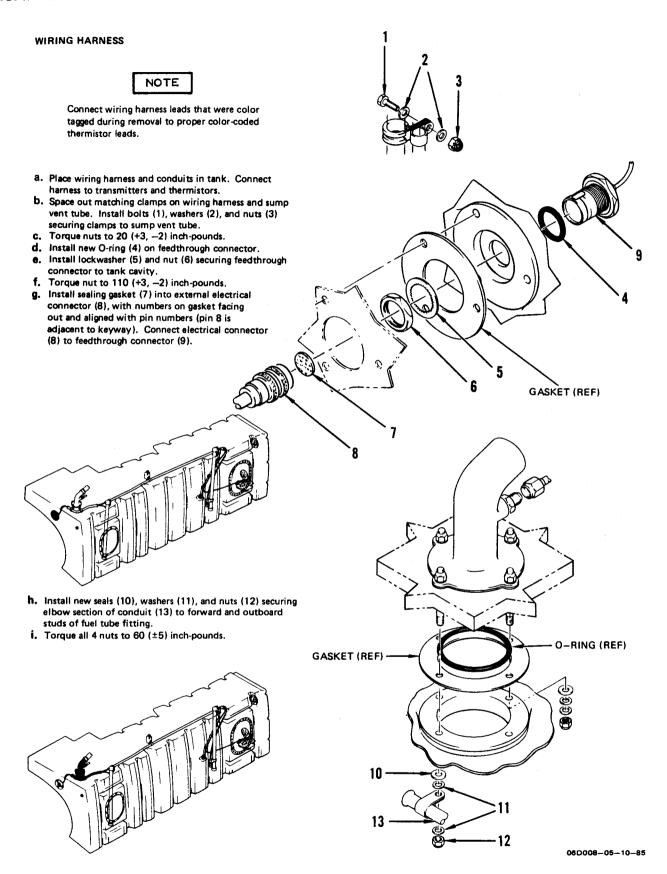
Installation; Forward Fuselage Tank (Sheet 5)
